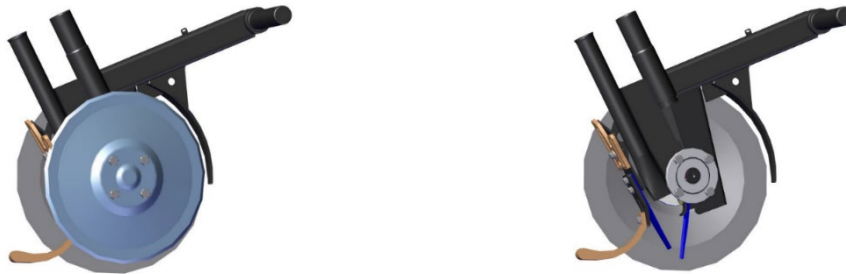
Seeding depth adjustment is done with quick latches which are in the front edge of each sledge. Remember to adjust each coulter sledge.
